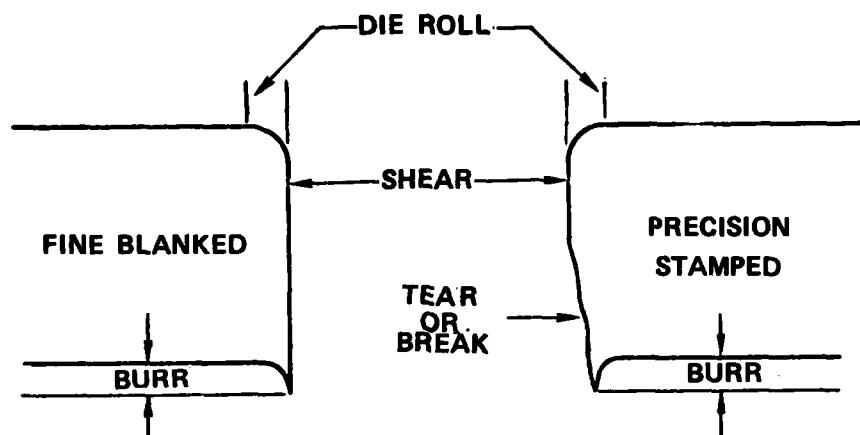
Cross-sectional view of a typical fine blanked and precision stamped part.
